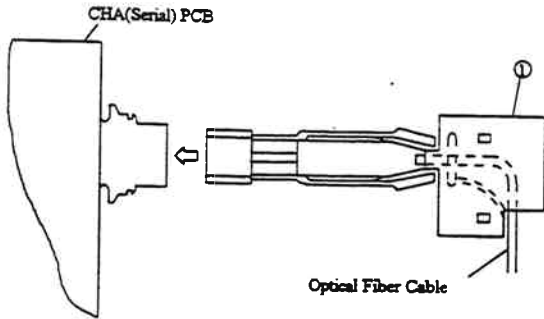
Connection of Optical Fiber Cable
